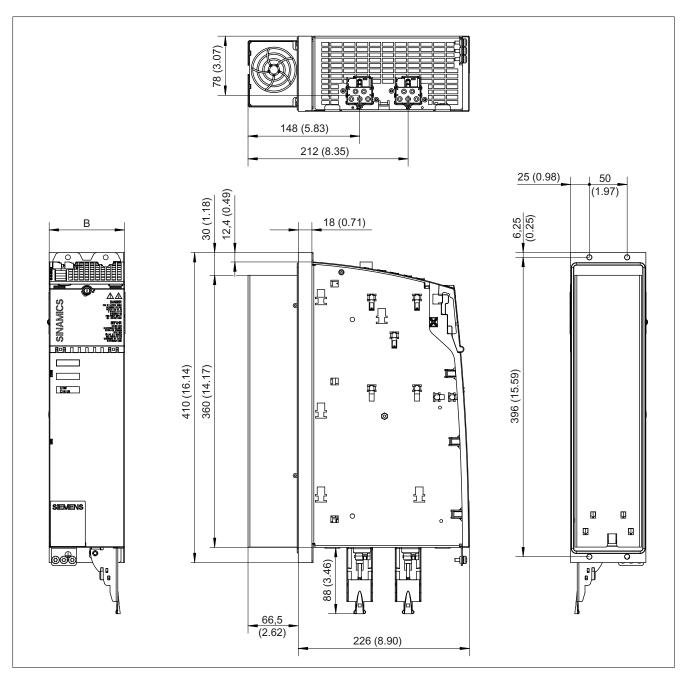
Dimension drawing of 30 A and 2 x 18 A Motor Modules Booksize with external air cooling, all dimensions in mm and (inches); example: 2 x 18 A Double Motor Module
